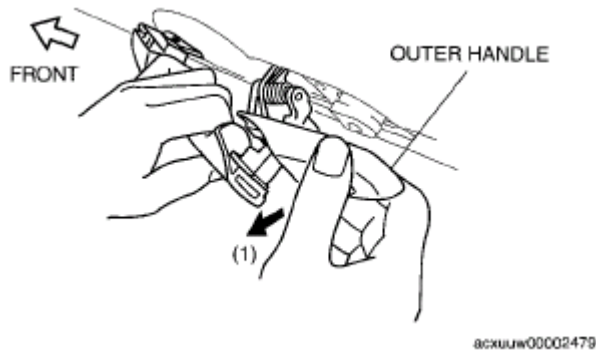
Pulling Out Front Side Of Front Outer Handle
